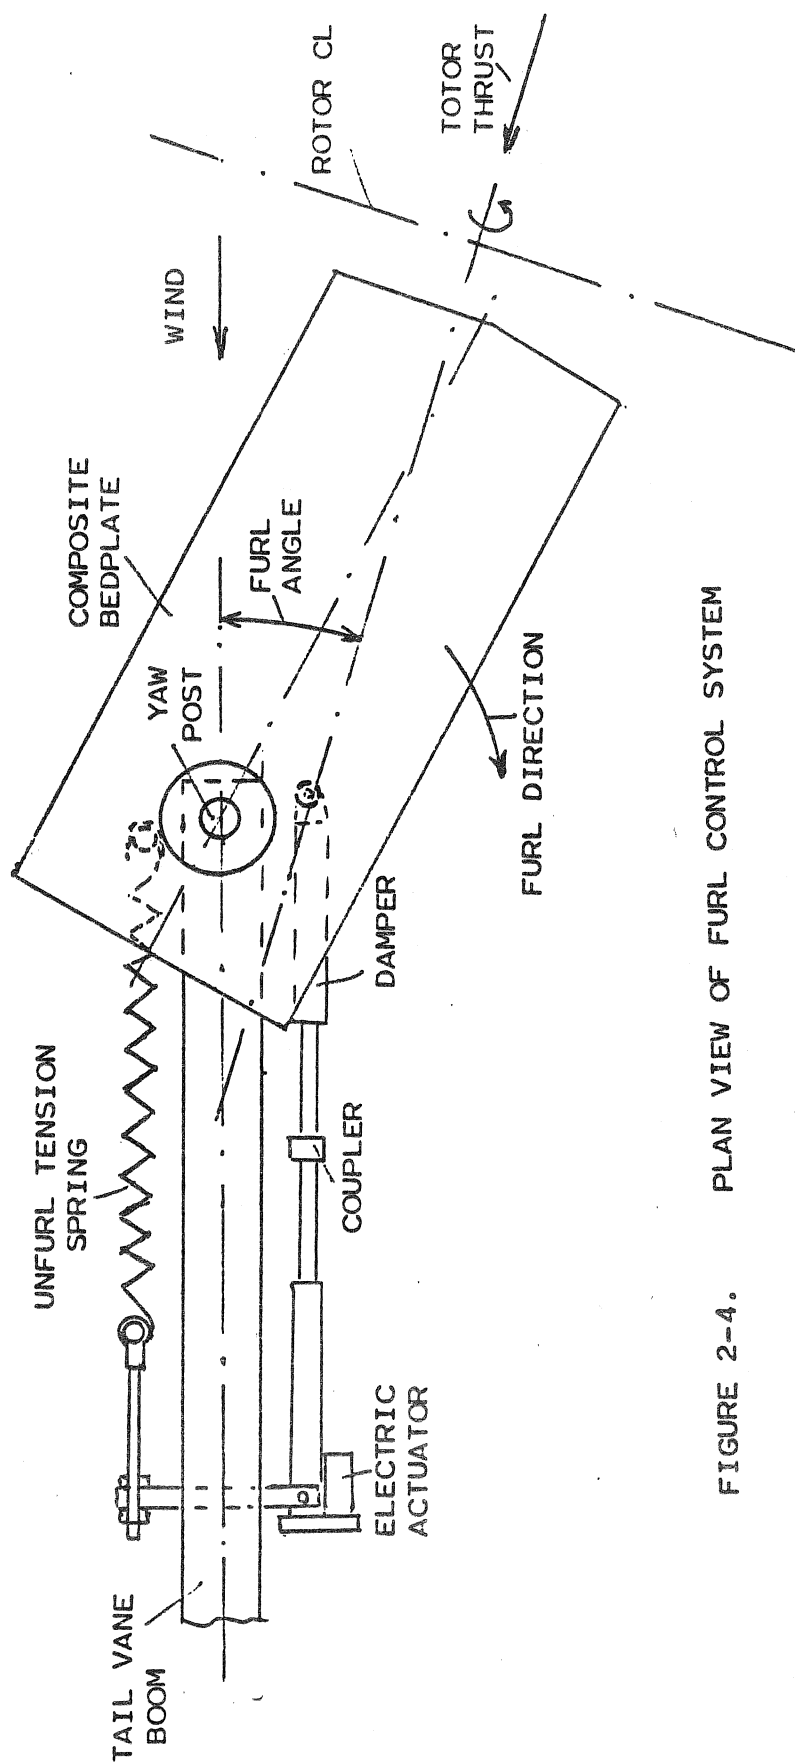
PLAN VIEW OF FURL CONTROL SYSTEM
